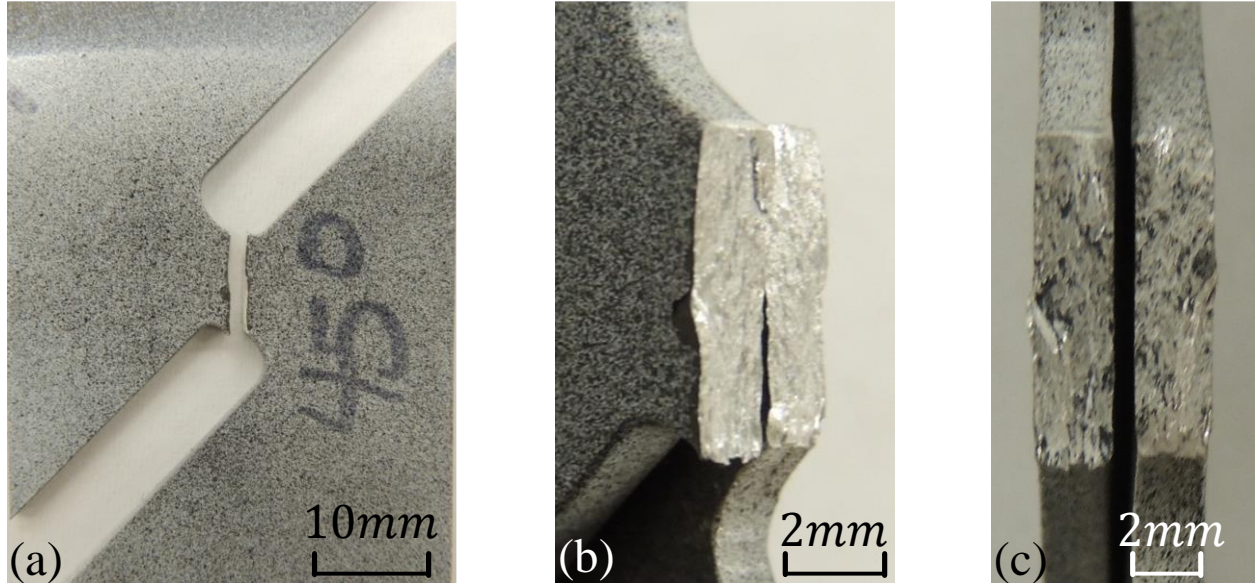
The fracture surface for shear specimen in the view of (a) front, (b) side and (c) thickness, respectively.
